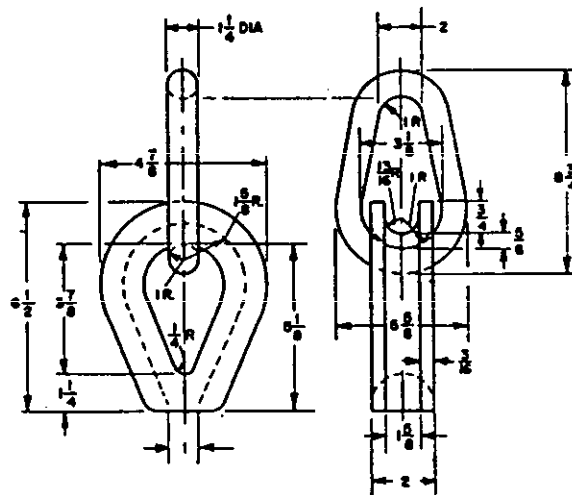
Link-thimble assembly for grapnel rope (1-3/8 inch diameter)
